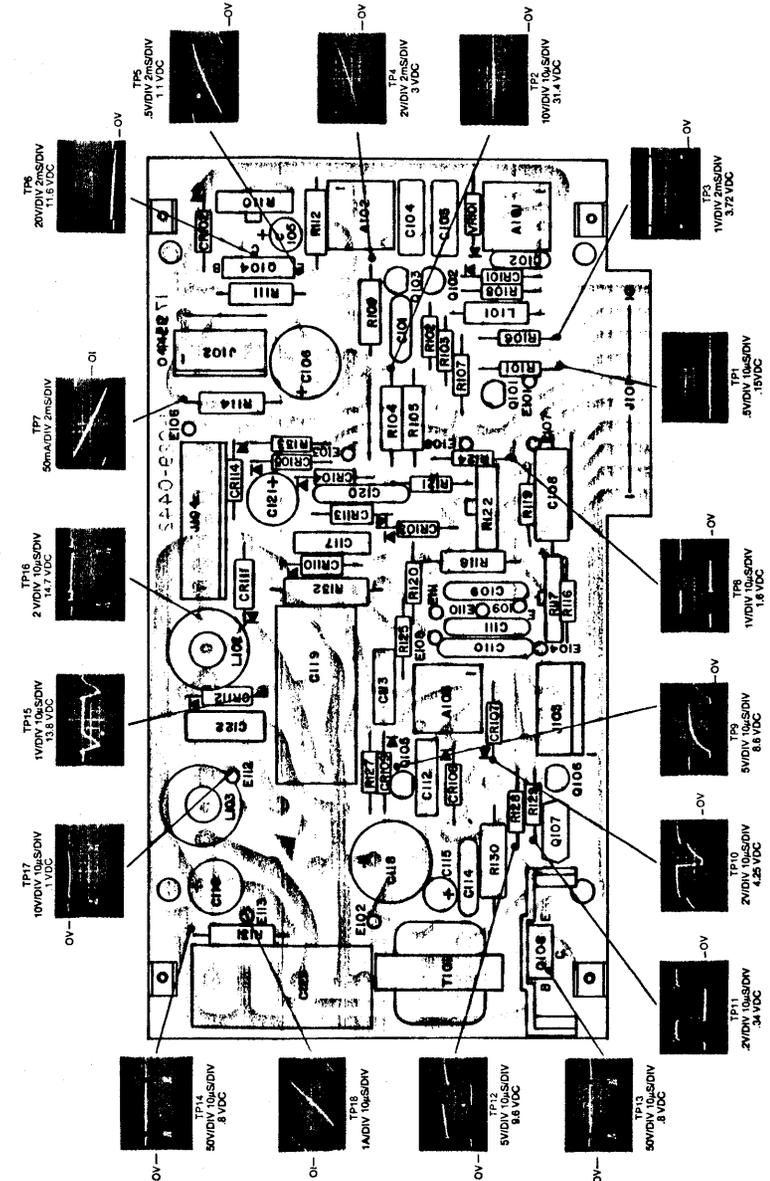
TV 90/120 AC Parts List, Waveform and Component Layout
